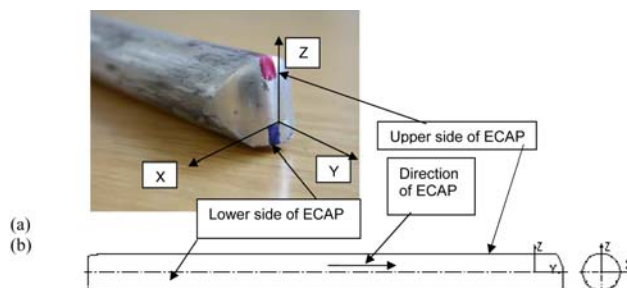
Direction of ECAP and its axes, (a) The anterior view of billet after pass one (red is upper and blue is lower side) and its axes, (b) Billet with the axes of coordinates.
